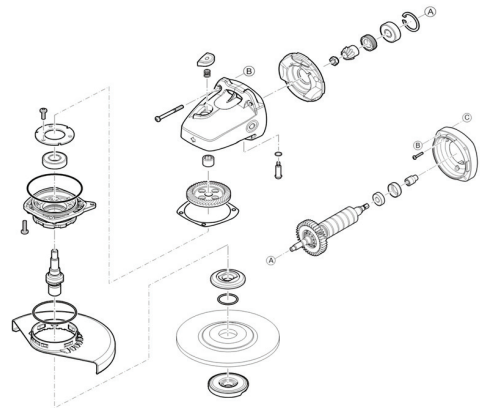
Explosion view of the FEIN CG 15-125 BL angle grinder (adapted from FEIN 2025)
